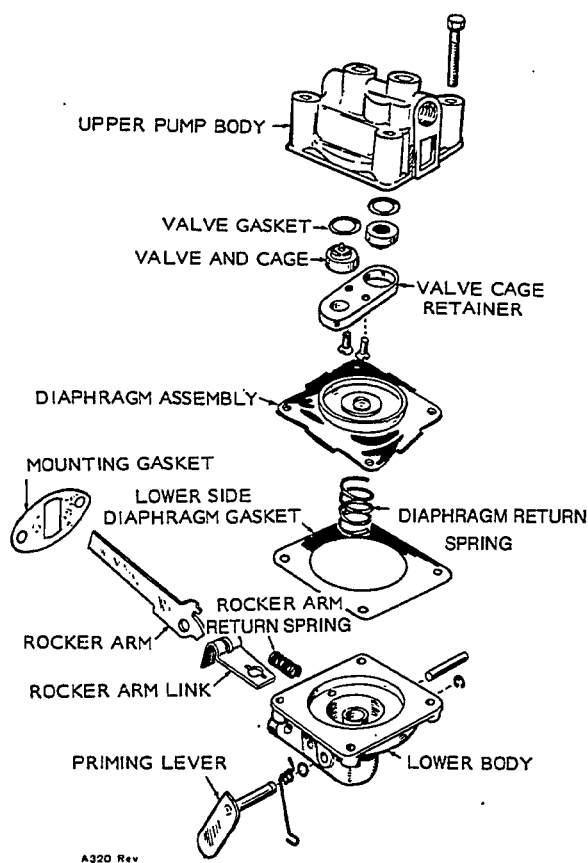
MECHANICAL FUEL PUMP - EXPLODED VIEW
